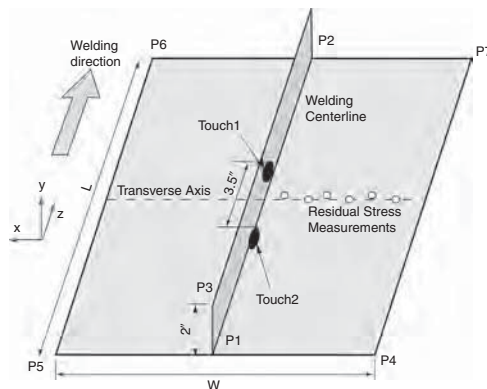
Geometry and welding condition. Source: Ref 15
